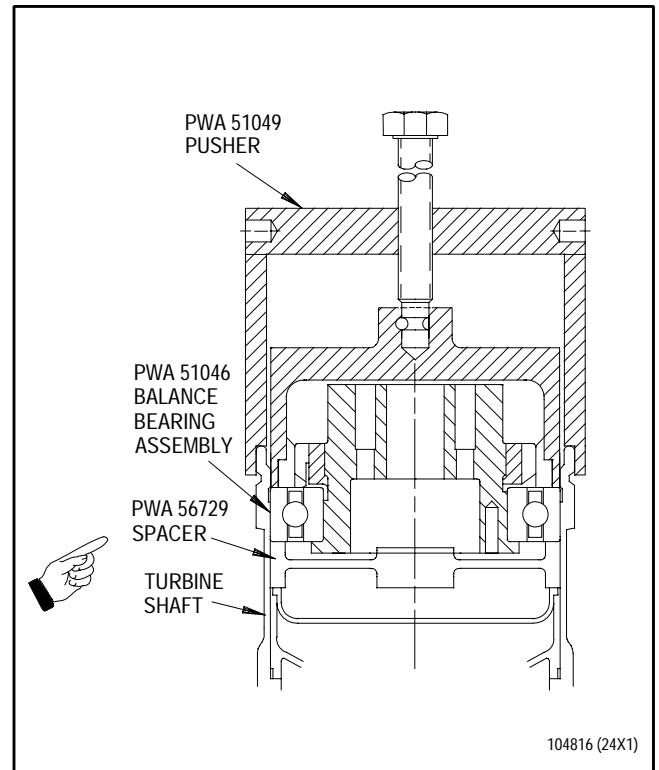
Front Compressor Drive Turbine Rotor and Stator - Installation into PWA 56338 Stand (Sheet 2 of 9)
